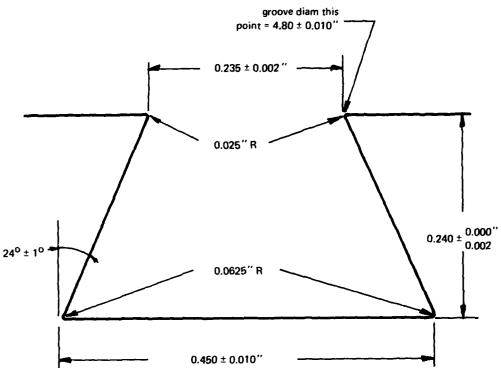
Groove configuration for 0-rings, and lobed rings in dovetail groove-flat flange seal systems.
